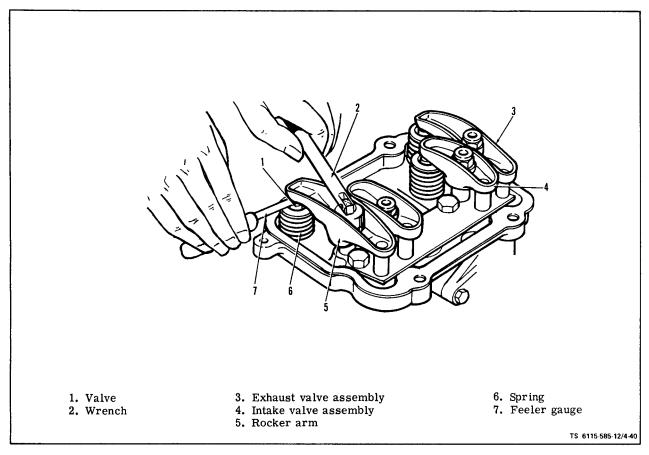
Checking and Adjusting Rocker Arm to Valve Clearance
